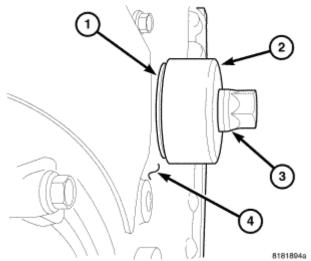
Installing Front Seal Courtesy of CHRYSLER LLC
